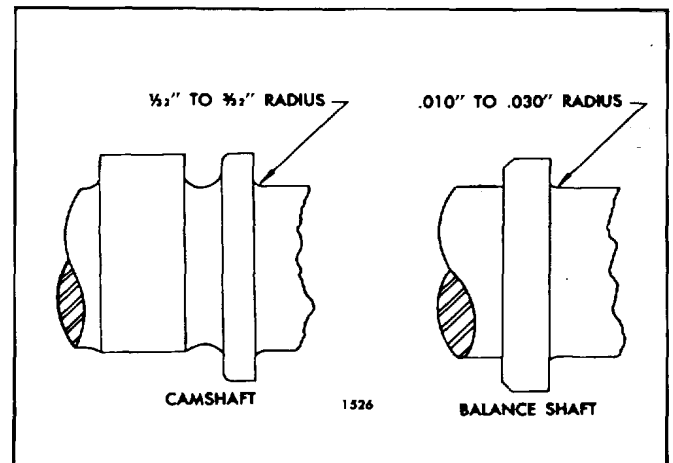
Camshaft and Balance Shaft Journal Fillets
